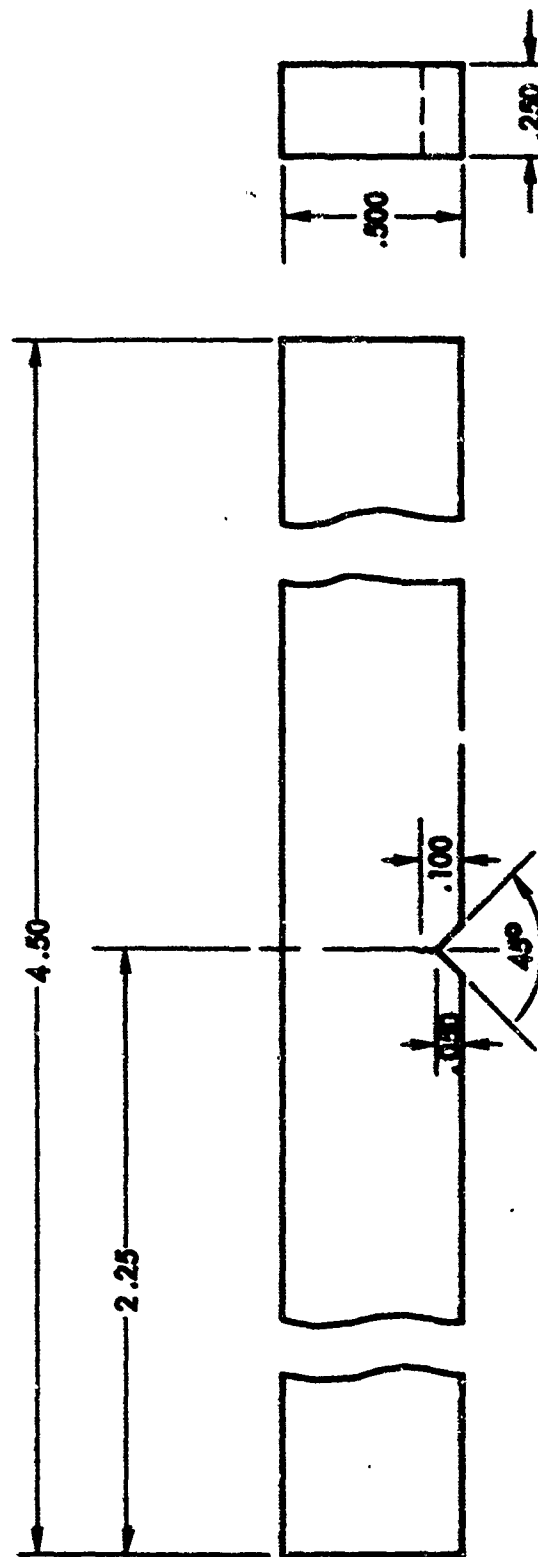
Fatigue Cracked Bend Specimen; Thin Extrusion
